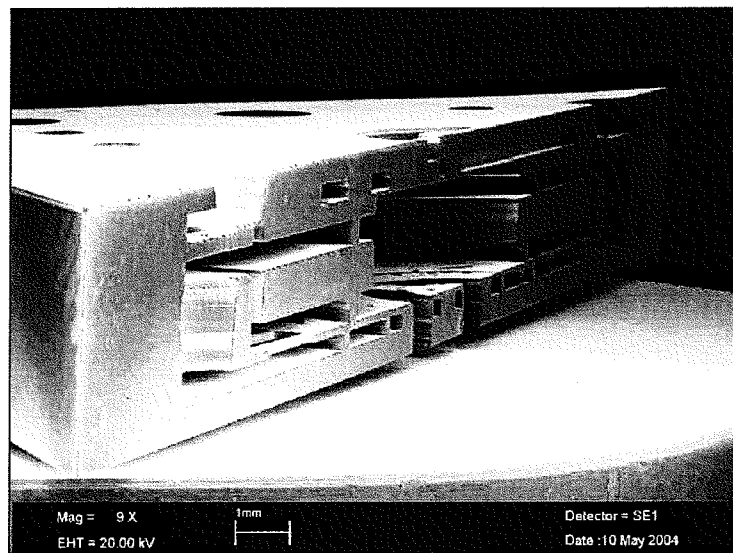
Cross-Section through a 9-layer MEMS gas turbine engine prototype.
